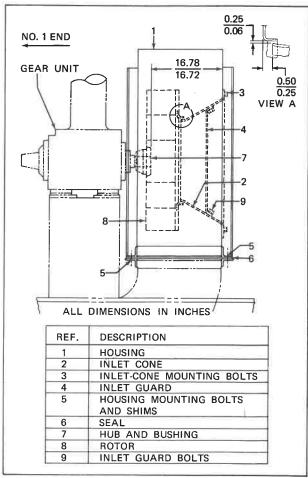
EQUIPMENT BLOWER ASSEMBLY.
